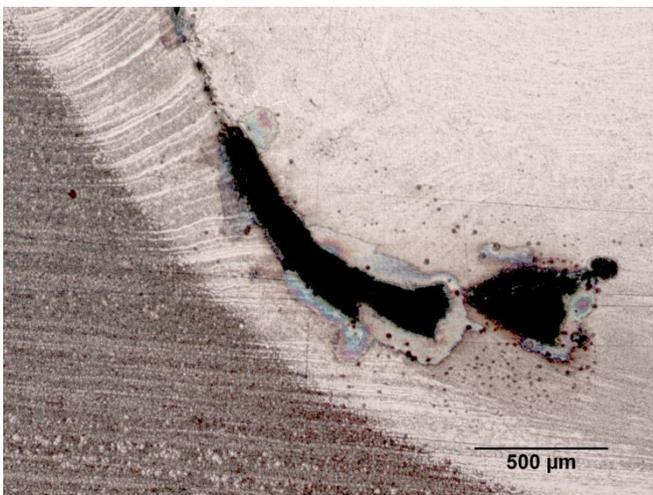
Void in sample welded at 12 ipm seen from the front of the weld.
